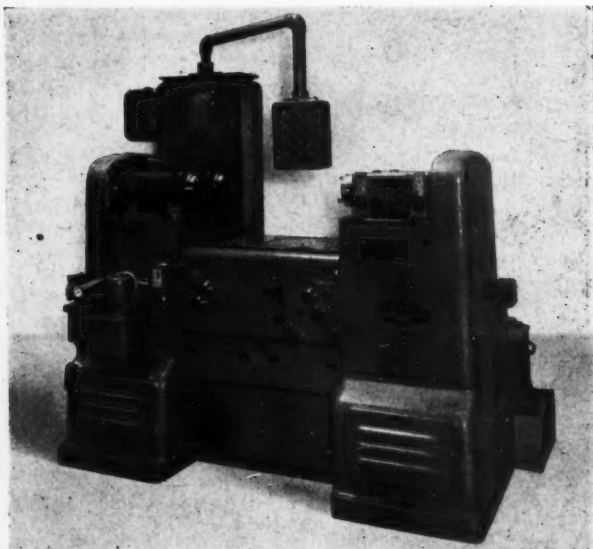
Déragne Diamanta 3 double-ended fine boring machine
